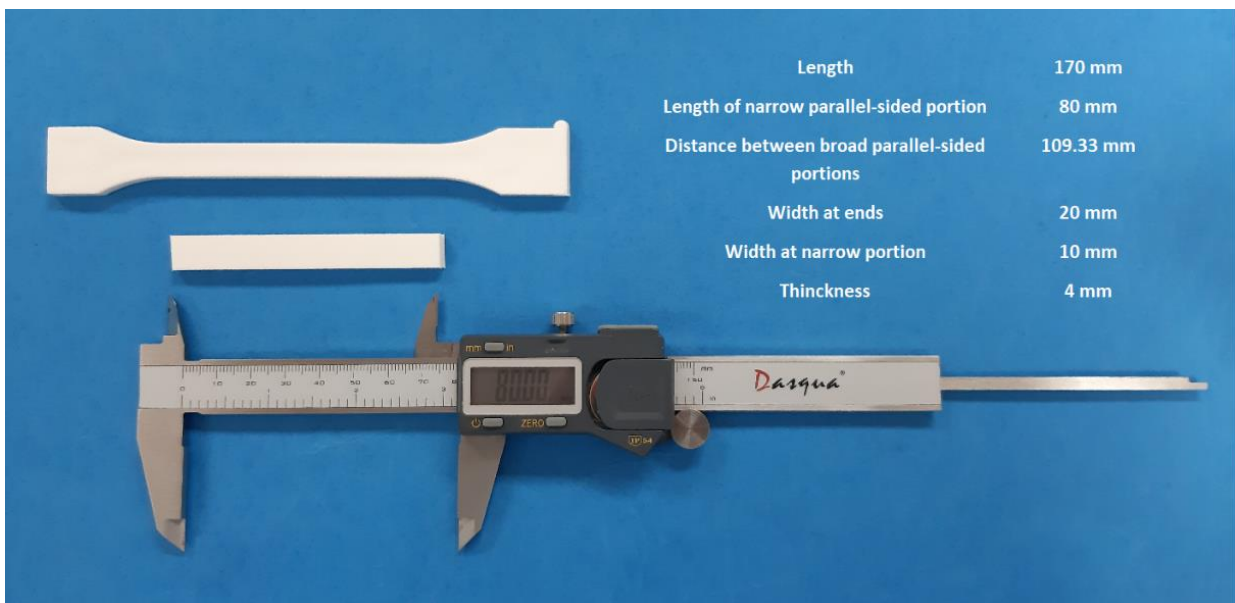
1A type of specimen used for tests in laboratory. Photo shows the standard dimensions
